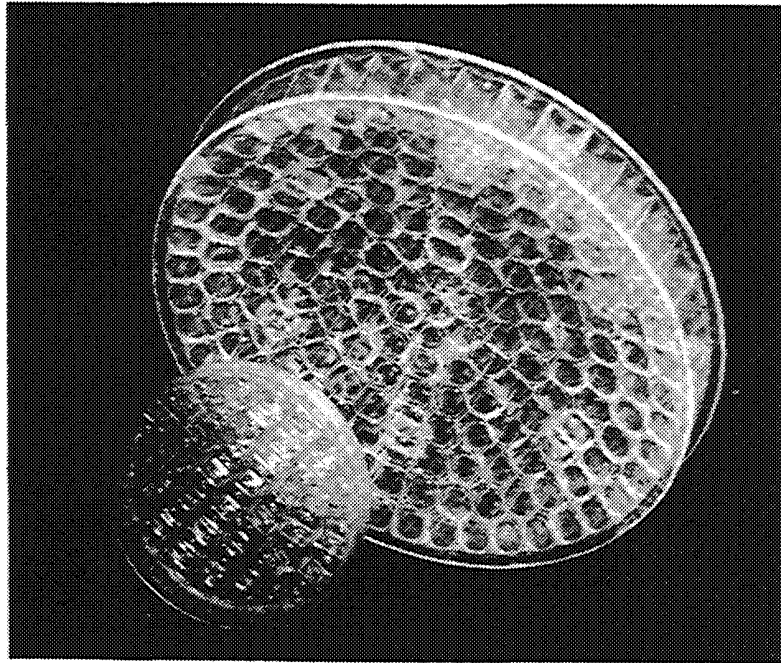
Lightweight, Gas Fusion mirror blanks after fusion and annealing. The 18" blank is plano while the 40" blank has been reheated and slumped to an f/0.5 curve.
